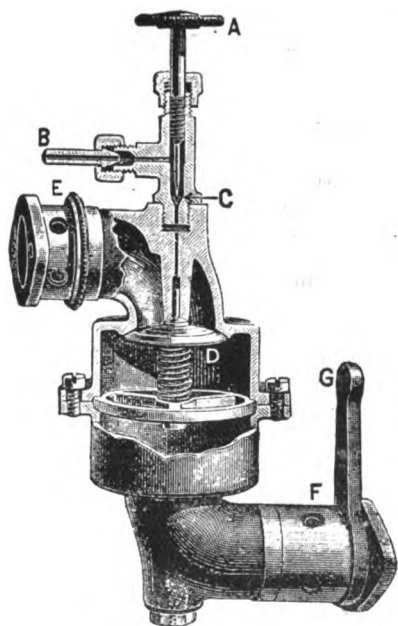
THE DALIFOL-THOMAS CARBURETTOR.
